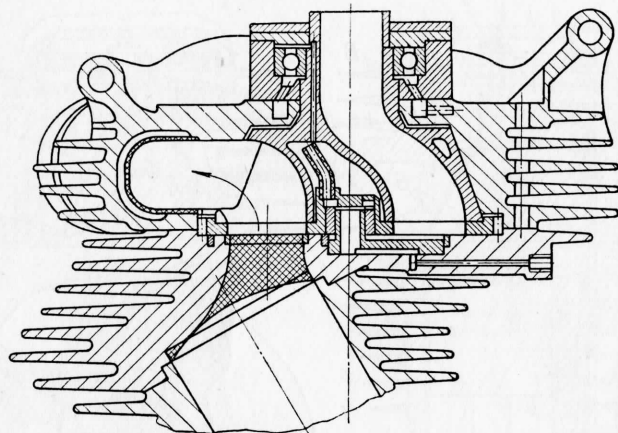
Section of the cylinder head of the NSU motor-cycle engine with sleeve valve gear.
